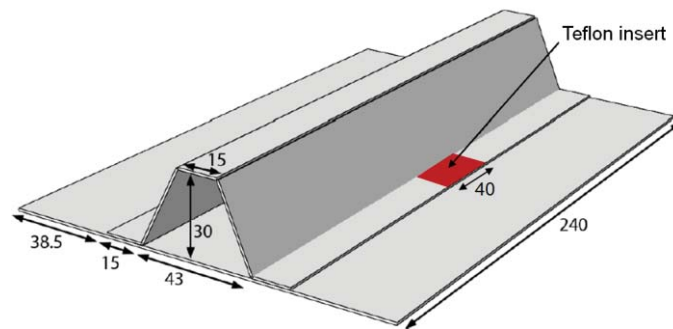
Single-stringer compression (SSC) specimen. (All dimensions in mm.).
